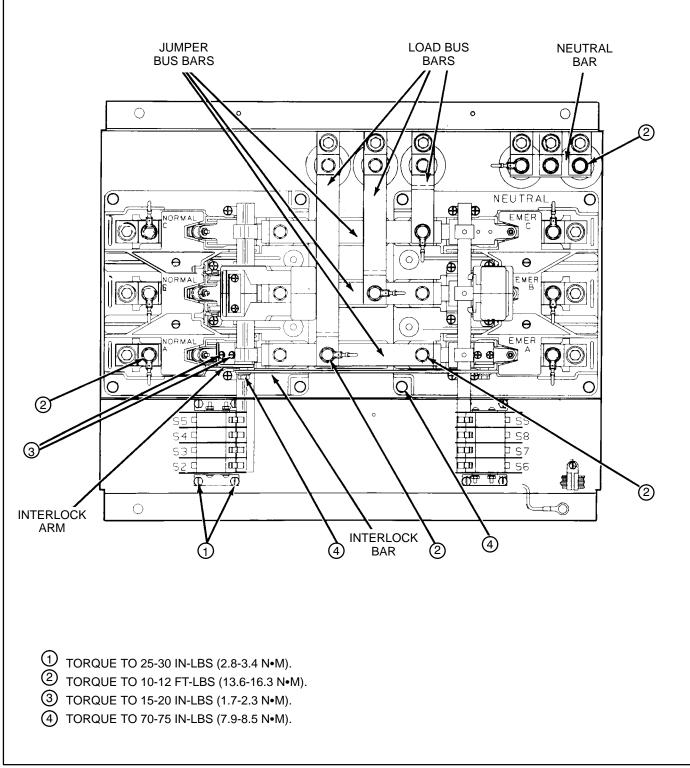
3-POLE SWITCH ASSEMBLY (150 TO 260 AMPERES)
